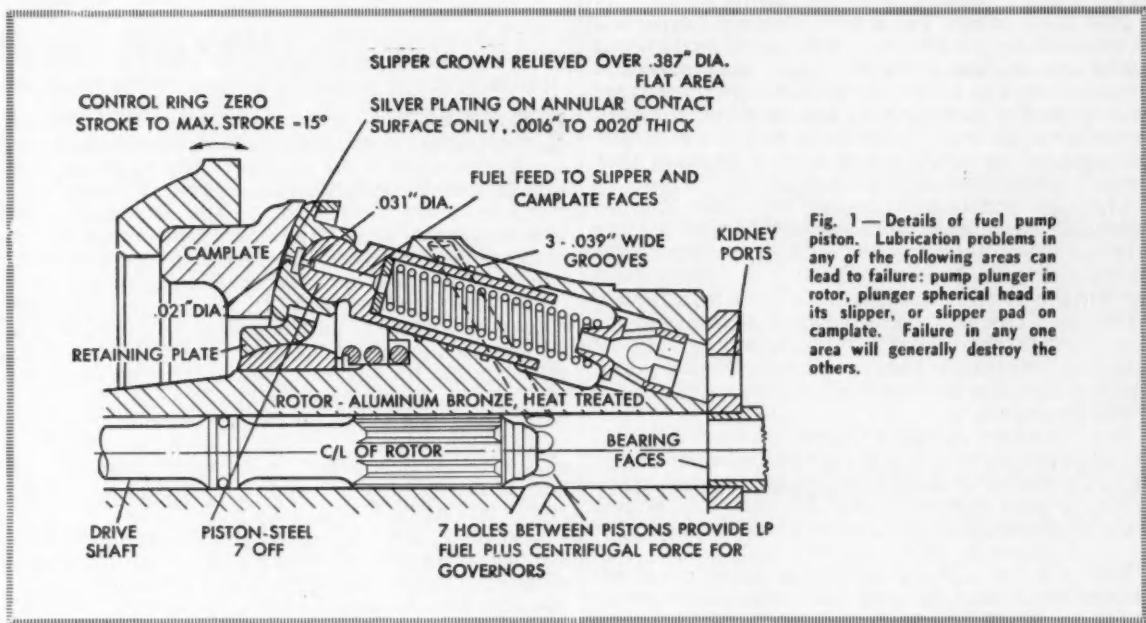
Details of fuel pump piston. Lubrication problems in any of the following areas can lead to failure: pump plunger in rotor, plunger spherical head in its slipper, or slipper pad on camplate. Failure in any one area will generally destroy the others.
